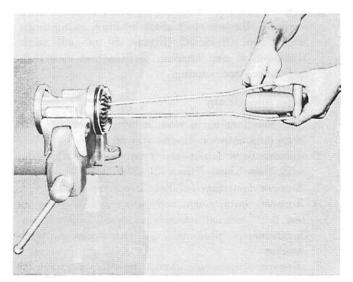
Pulling Reverse Gear From Bearing Carrier Revised Feb. 1966 Page 79
